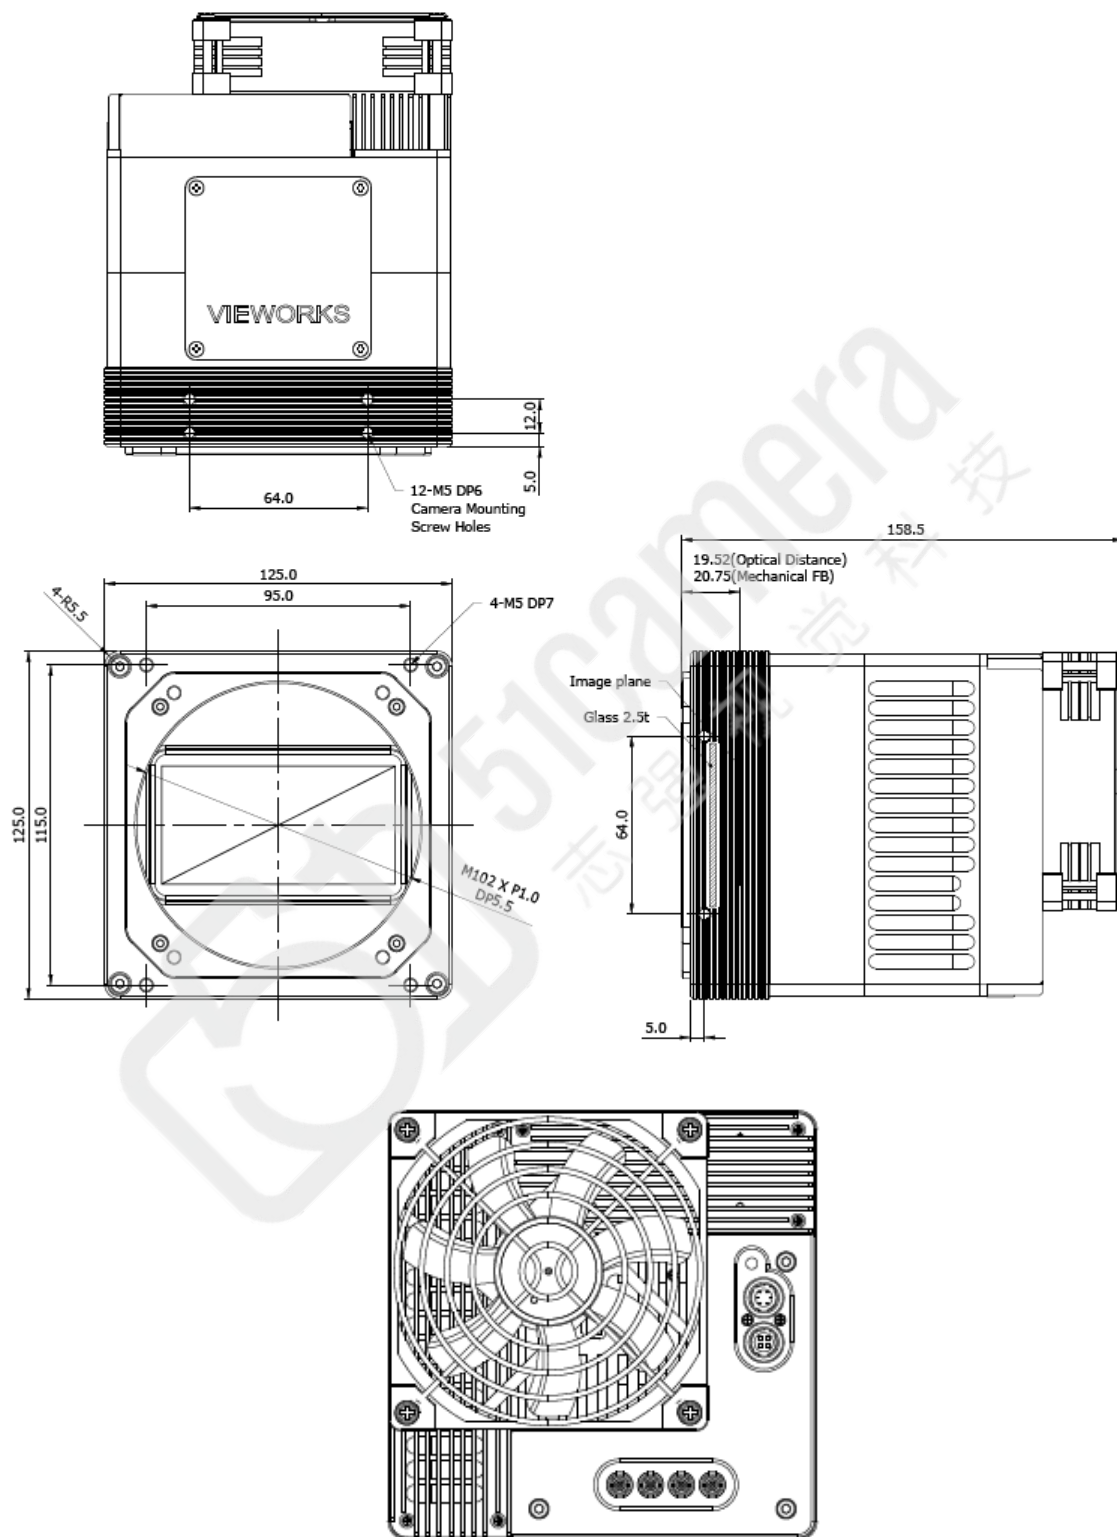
VNP-1152MX2 Mechanical Dimension
